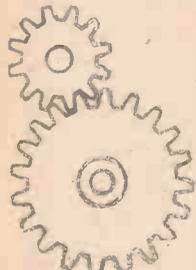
Spur gear wheel and pinion giving a ratio of 1 : 2.
